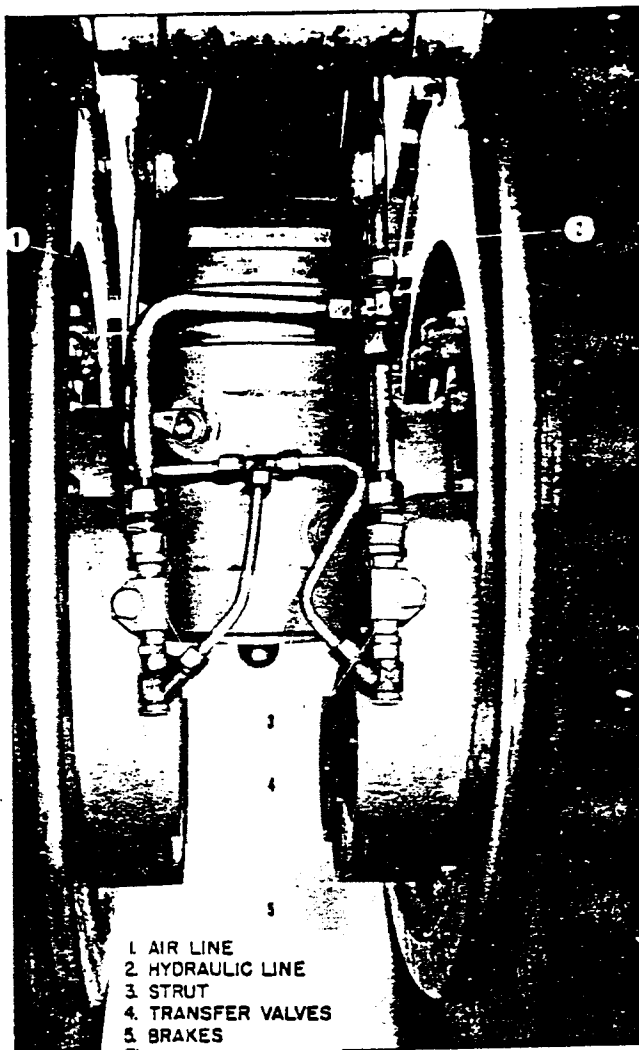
Emergency Air Brake Transfer (Shuttle) Valve
